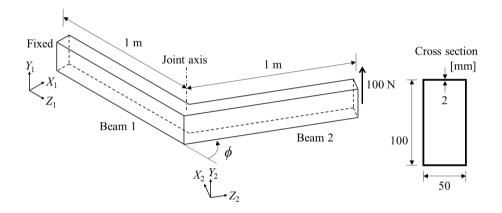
L-type joint structure with rectangular section subjected to vertical force
